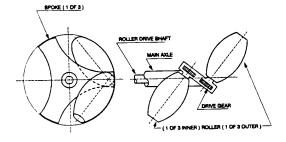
Modified Wheel for Higher Traction and Lower Contact Pressure.
